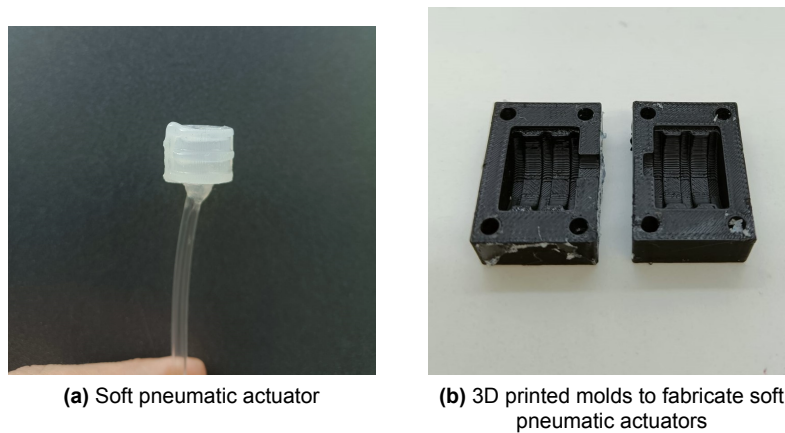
Example of soft pneumatic actuator and complementary mold design.
